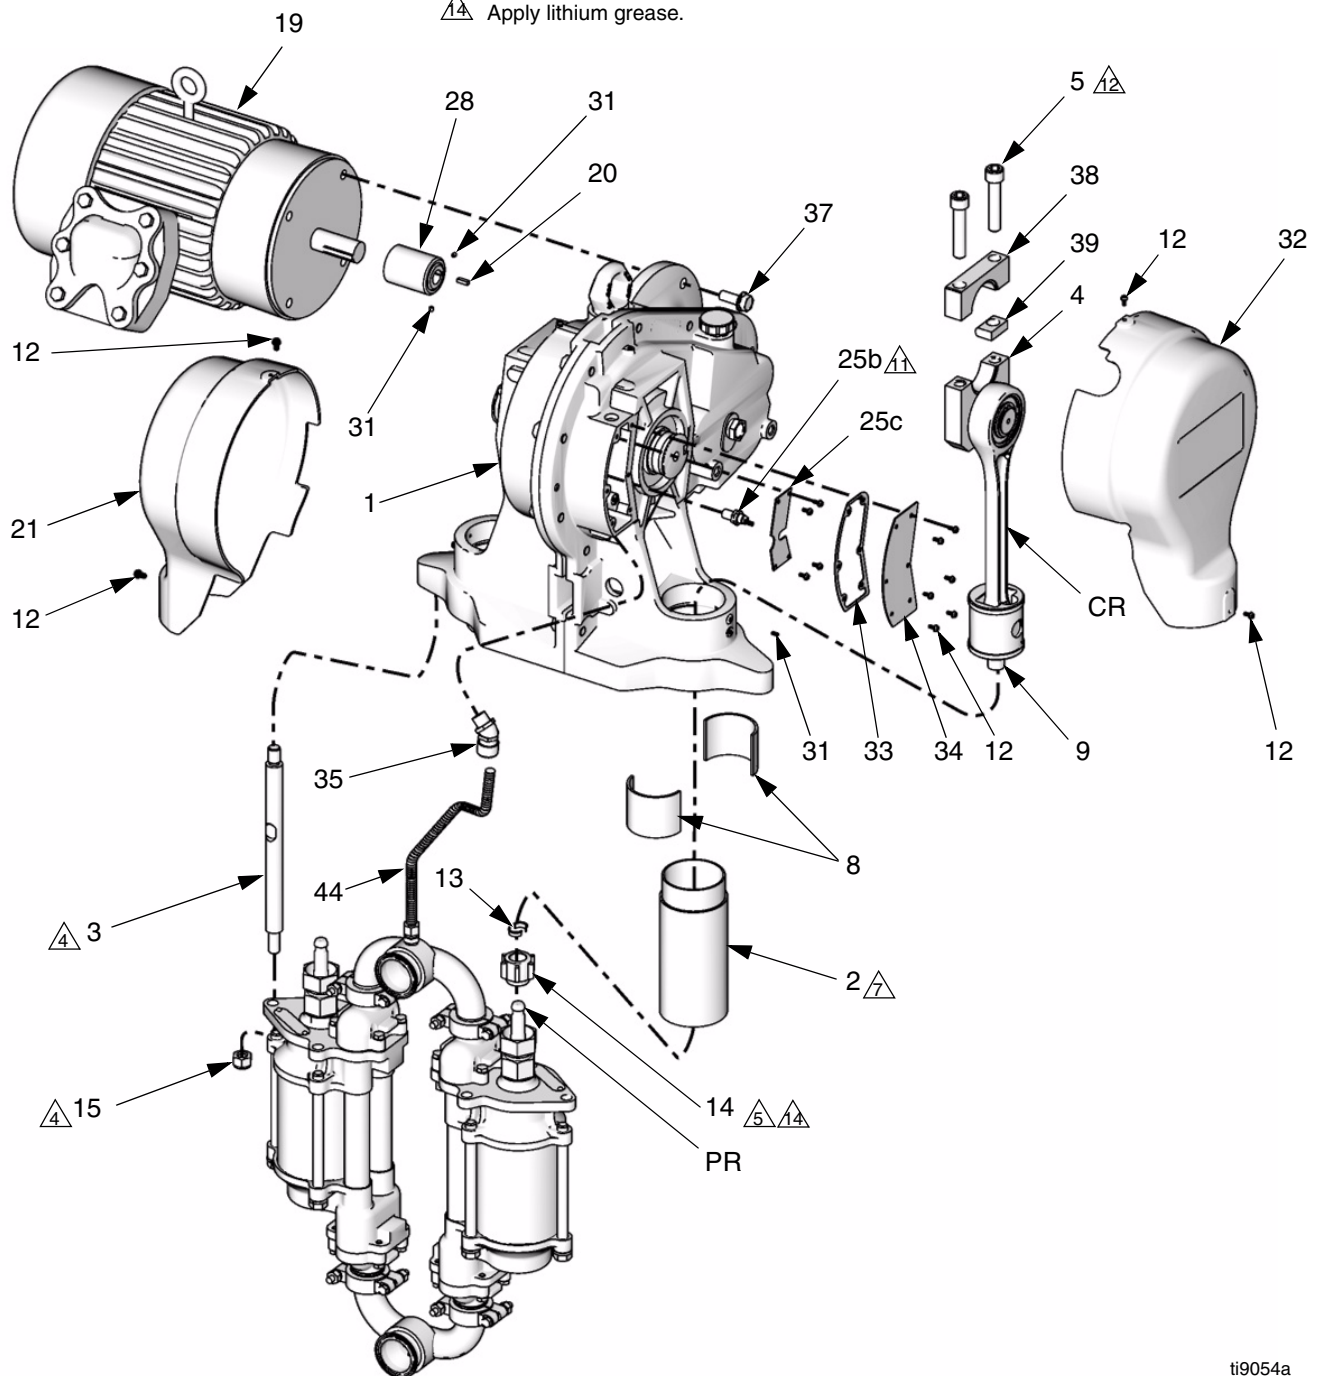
NEMA 184 TC Frame Electric Motors
